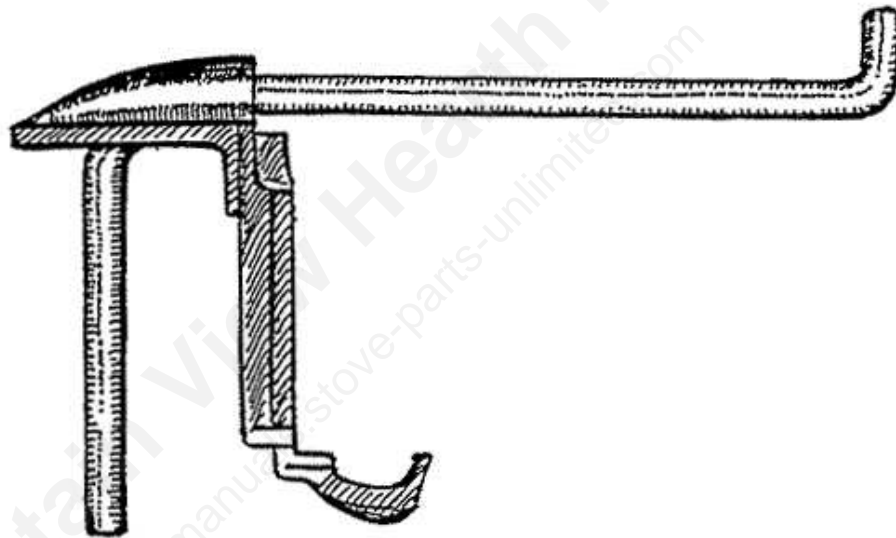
INSIDE VIEW OF PARTIALLY ASSEMBLED STOVE
